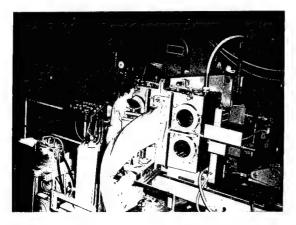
Saturn V Y-ring weld joint positioned in vacuum chamber prior to electron beam welding.
